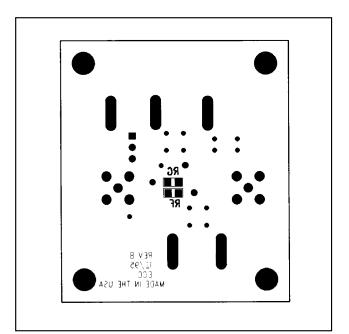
MAX477 EV Kit Component Placement Guide—Solder Side
